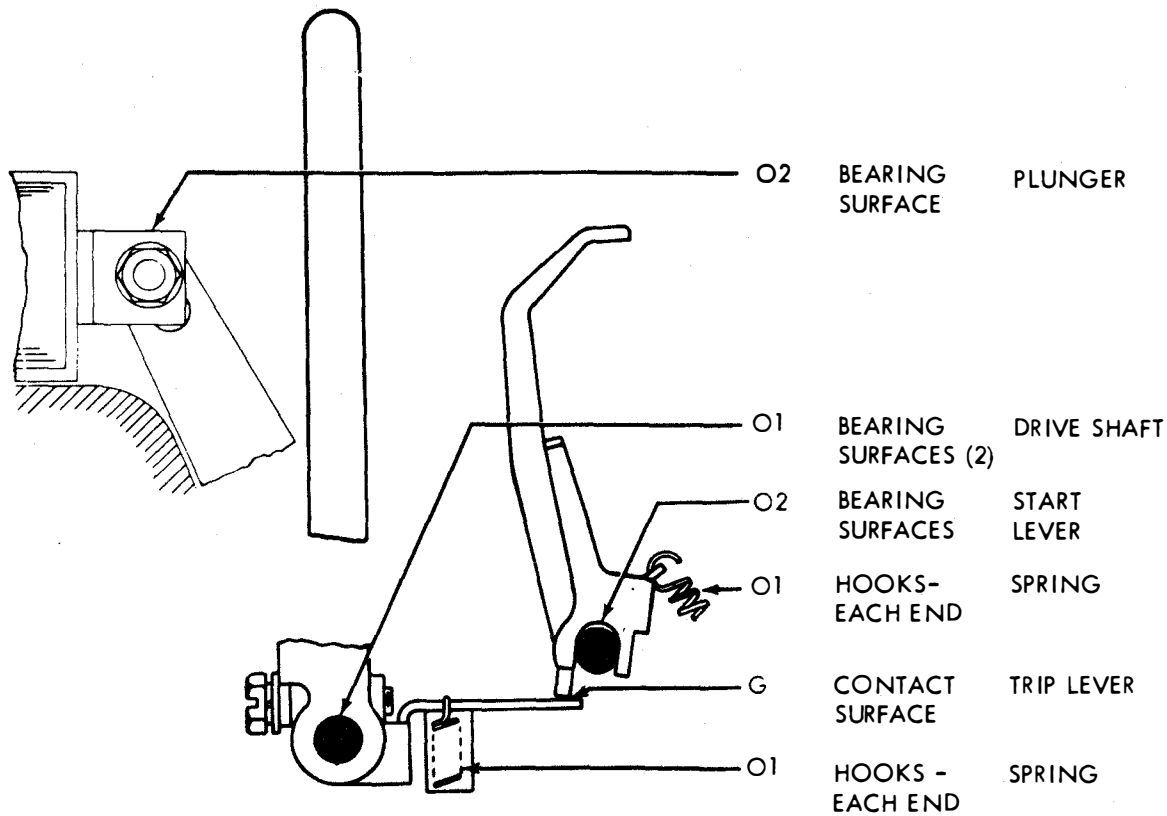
Manual and Solenoid Operated Interfering LTPS Tape Feed-Out Mechanism, Right Front View
